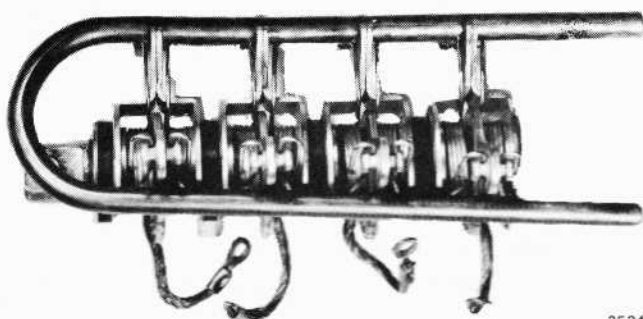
Lever And Shaft Assembly Alignment Tool Application 25342
